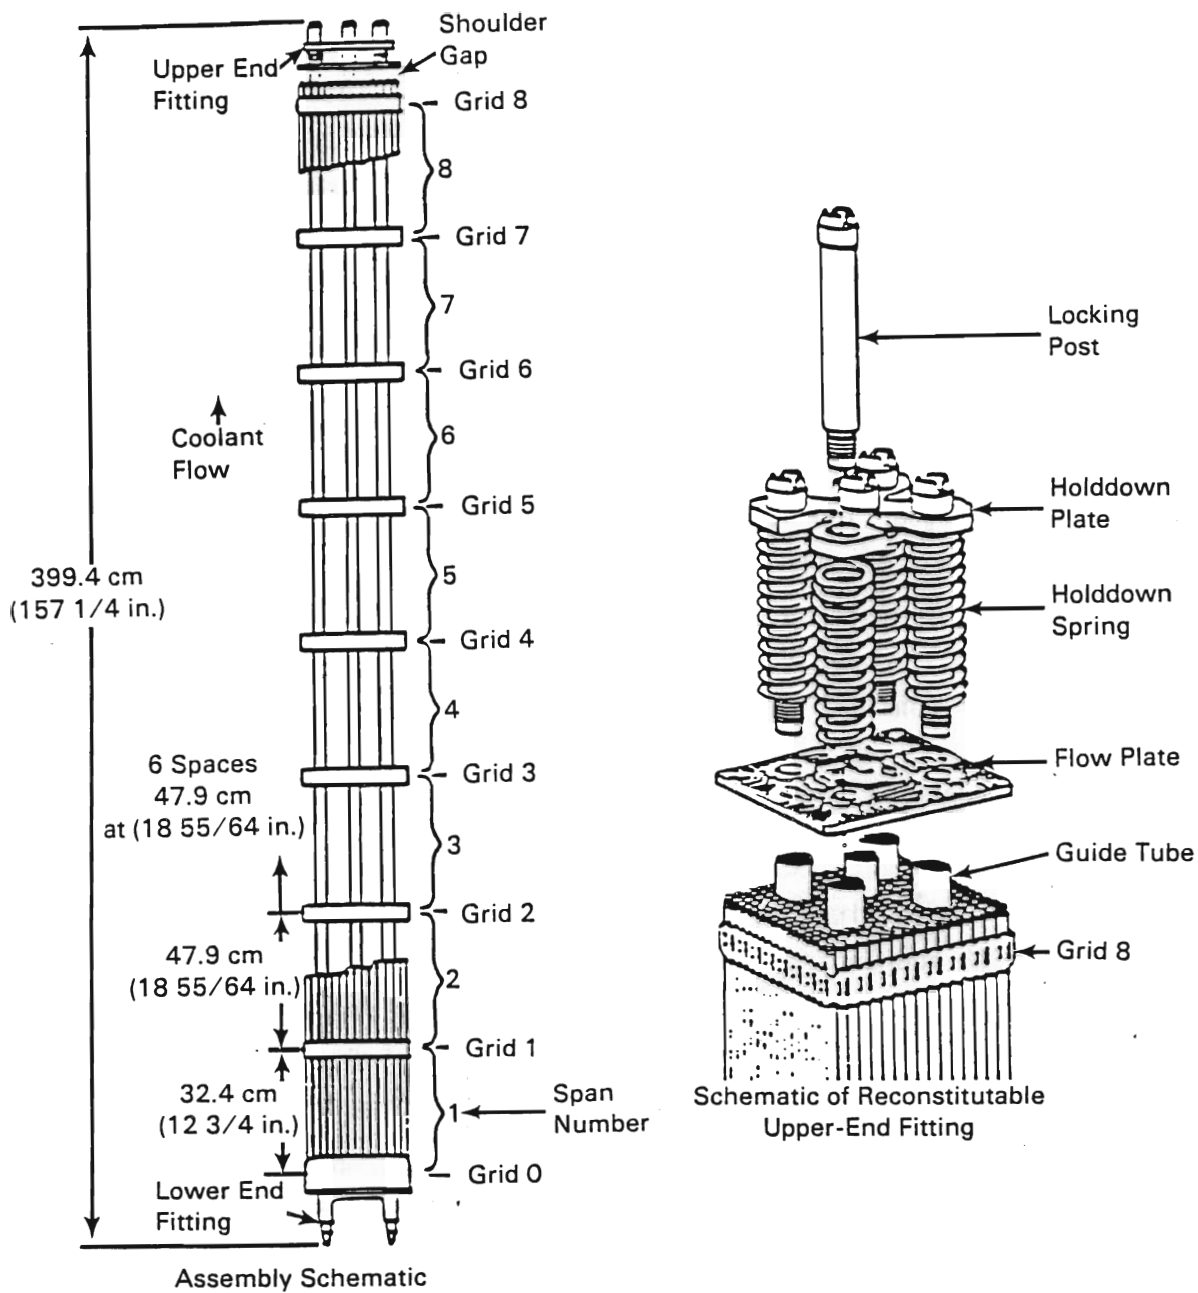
Combustion Engineering 14 x 14 Fuel Assembly Schematic
